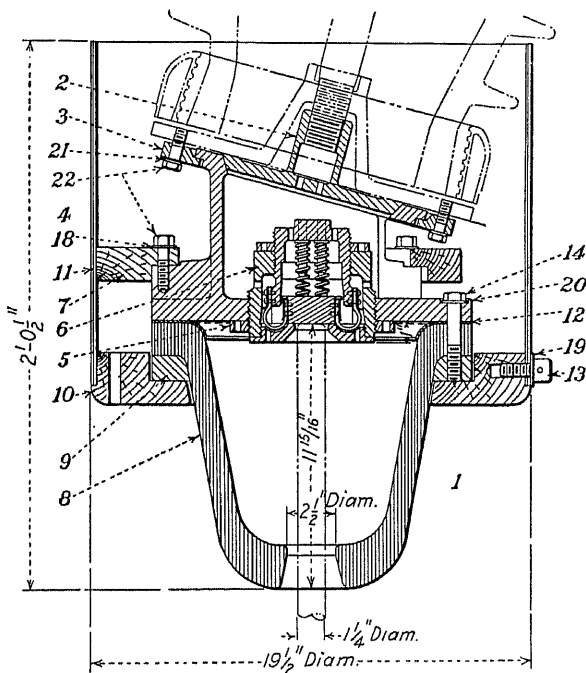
Details of General Electric explosion pots with butt contacts for extra high-speed breakers.
